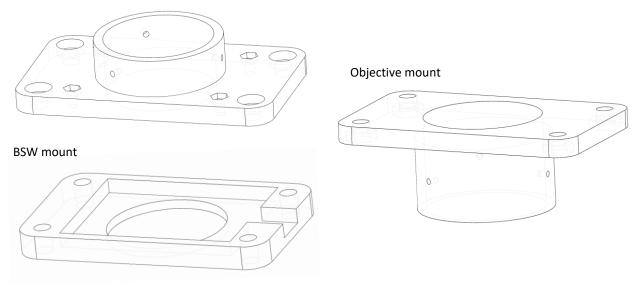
Custom parts used for mounting the camera, BSW-20, and the objective together. Detailed design files are provided by request.
